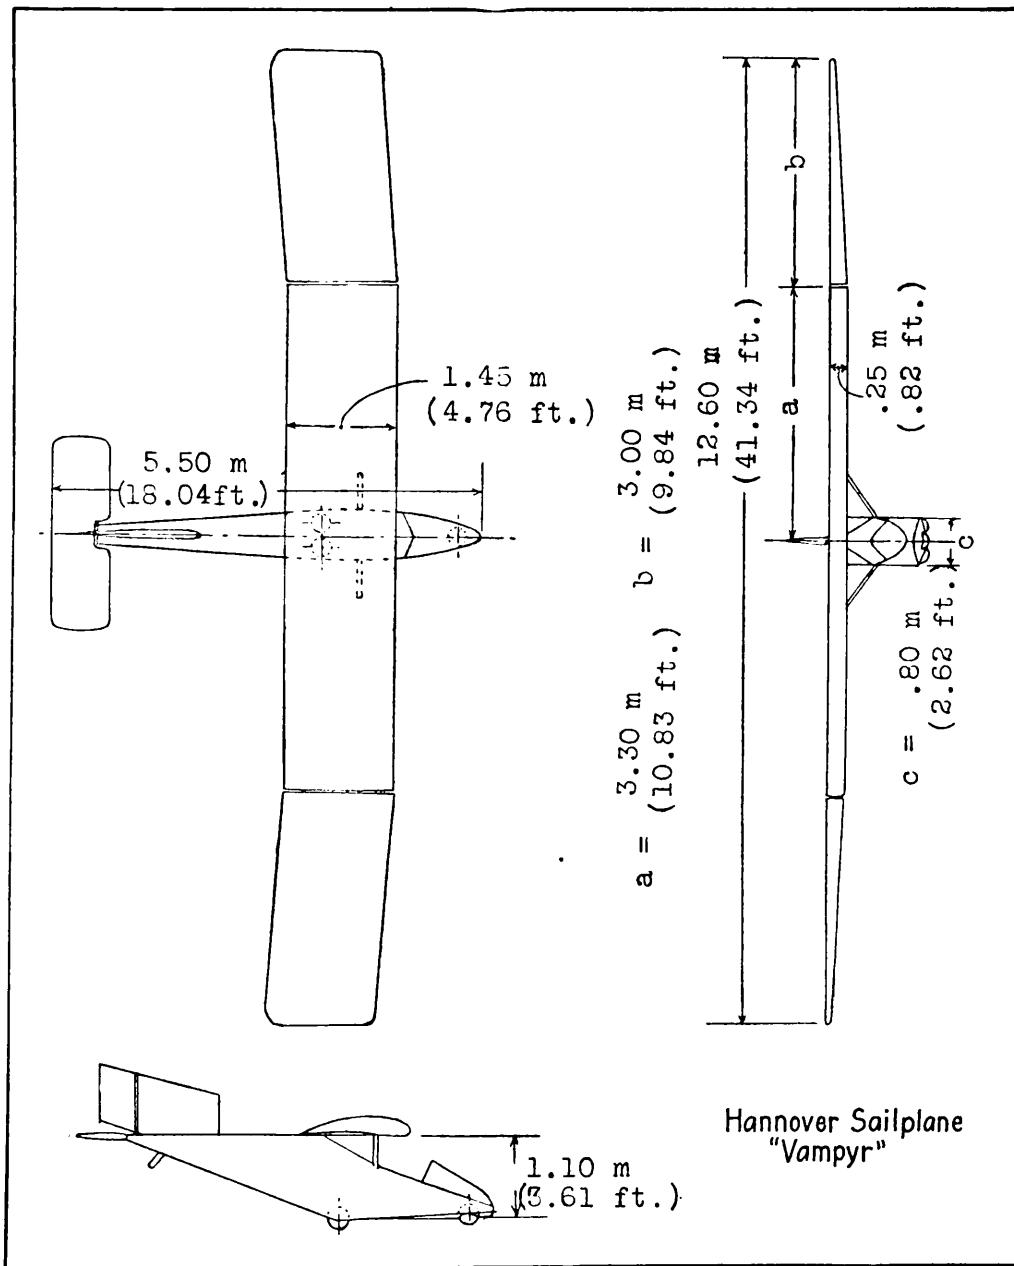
Outline Drawings Showing the Side, Plan and Front Views of the Hannover Sailplane "Vampyr."
